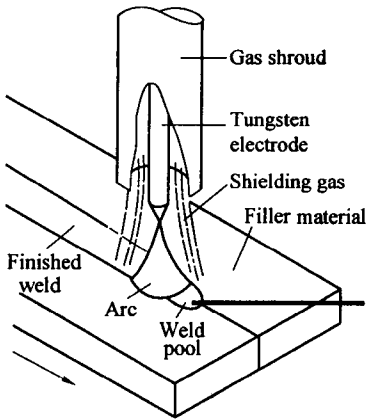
The operating principle of gas tungsten arc welding
